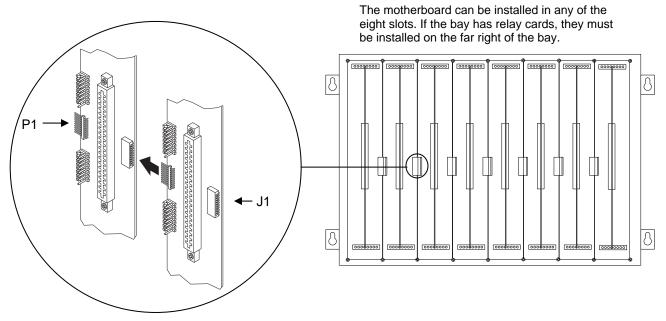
Installing the Motherboard into a 4100 Expansion Bay
